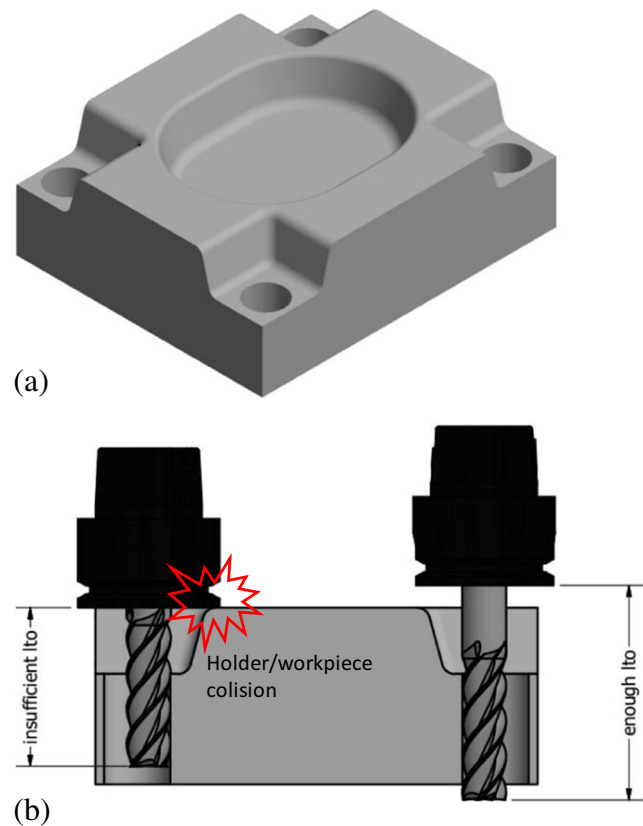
a Mold with hole-making tasks. b Insufficient \times enough tool overhang length (l_{to}) for the helical milling
